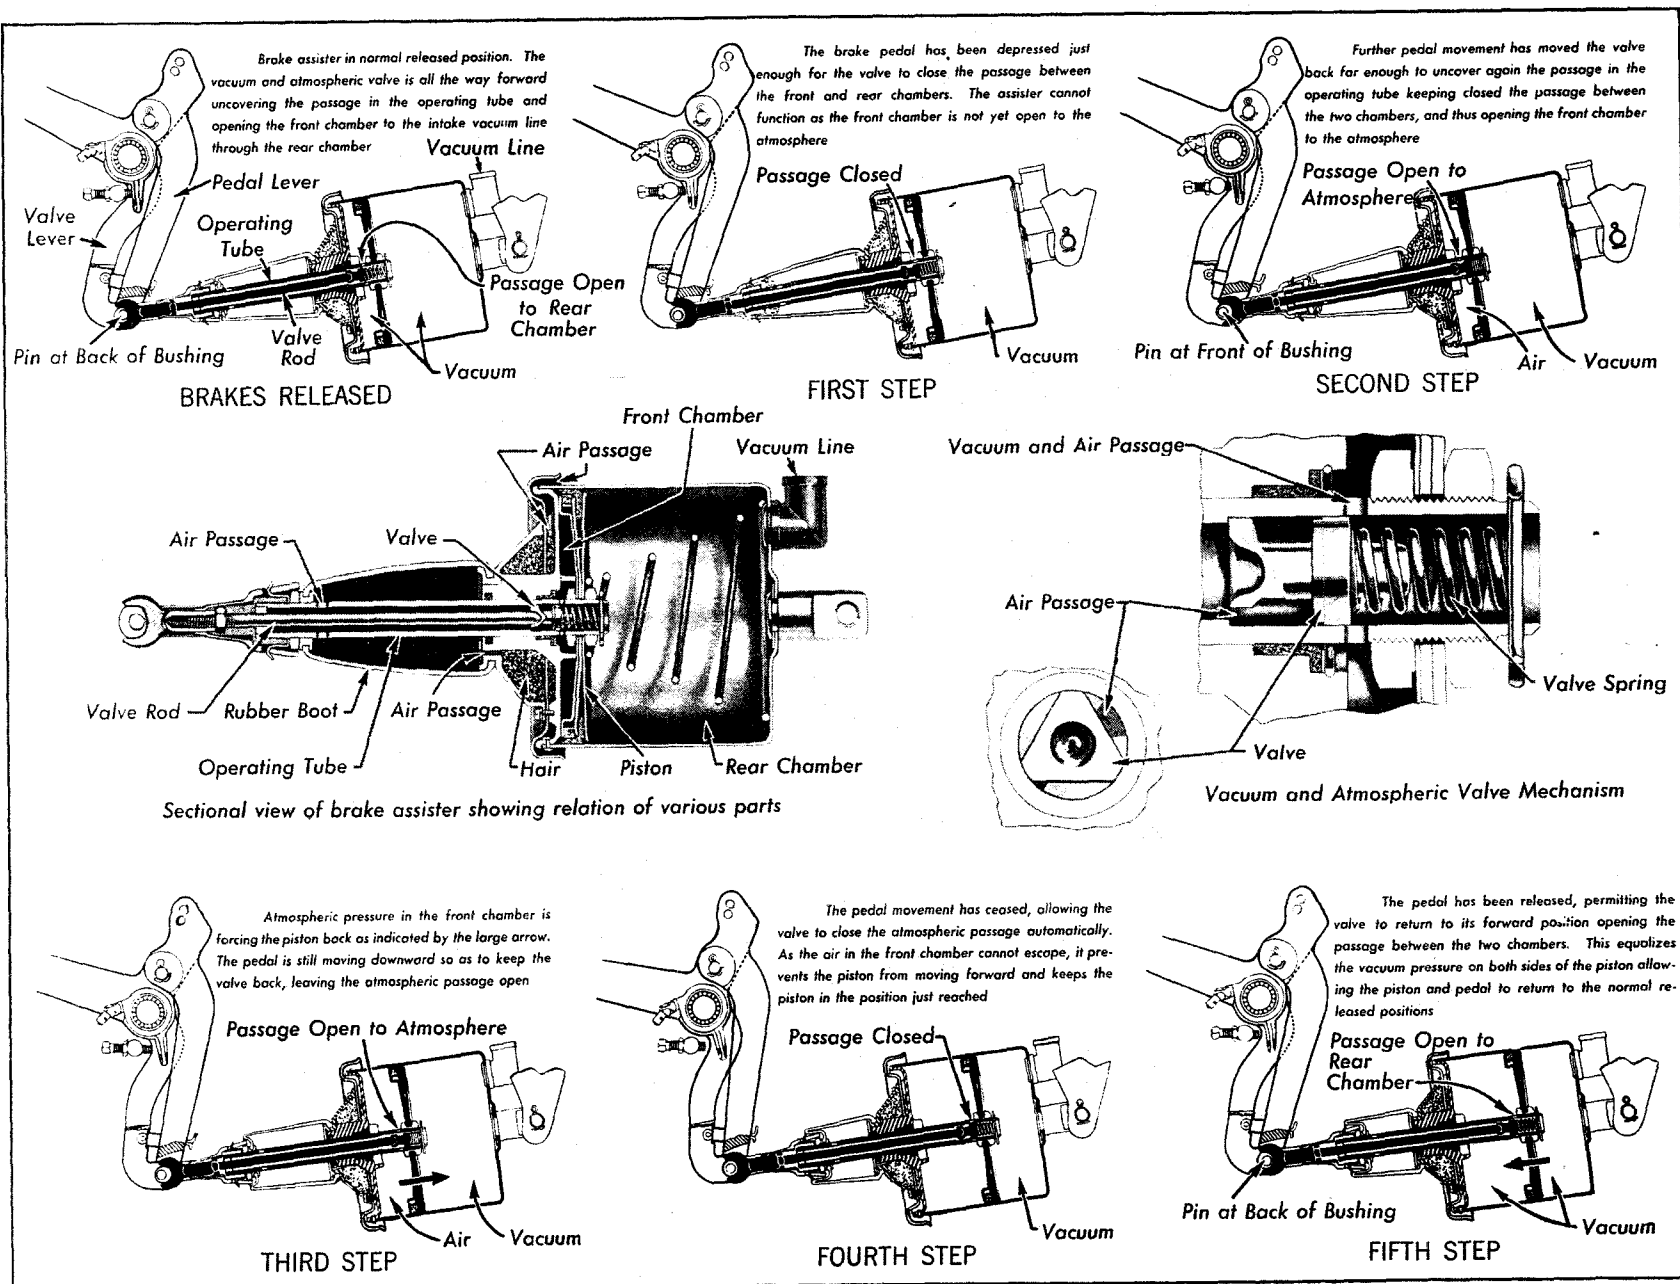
A. Diagrams Showing Operation of Vacuum Brake Assister—
